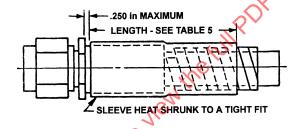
TUBULAR COIL ABRASION END /10/ /11/
